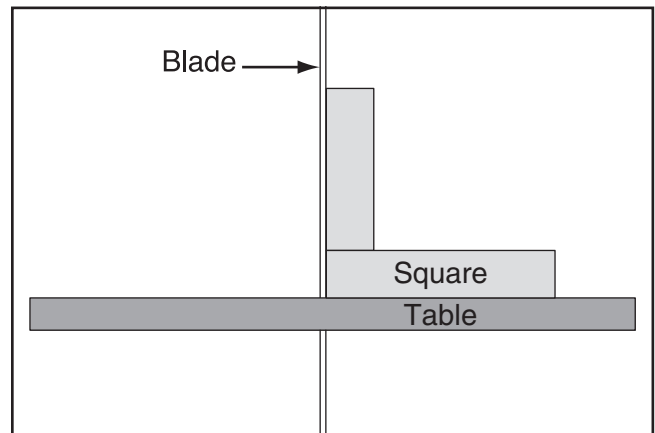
Using a square to adjust table perpendicular to the side of blade.
